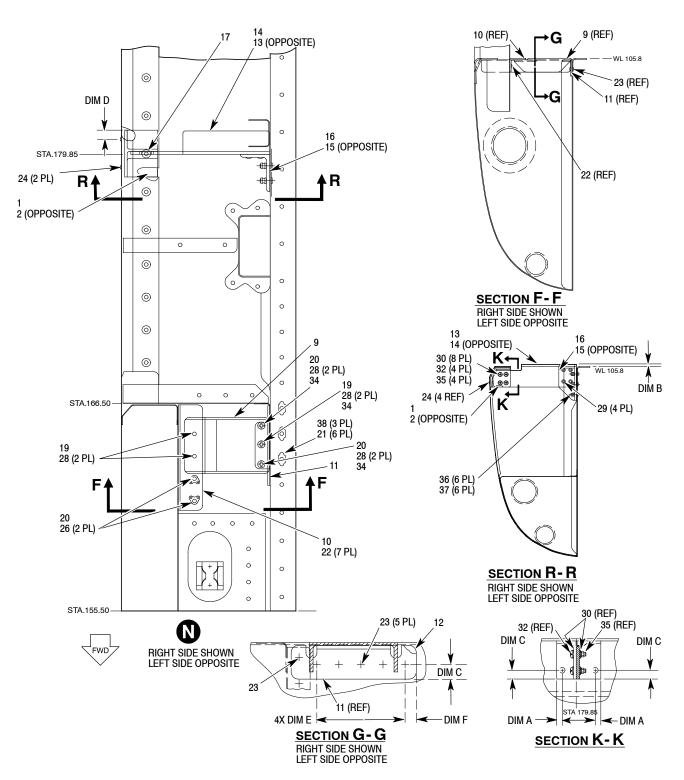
Modification of the 902 Configuration Tub Assembly (Sheet 2 of 3)
